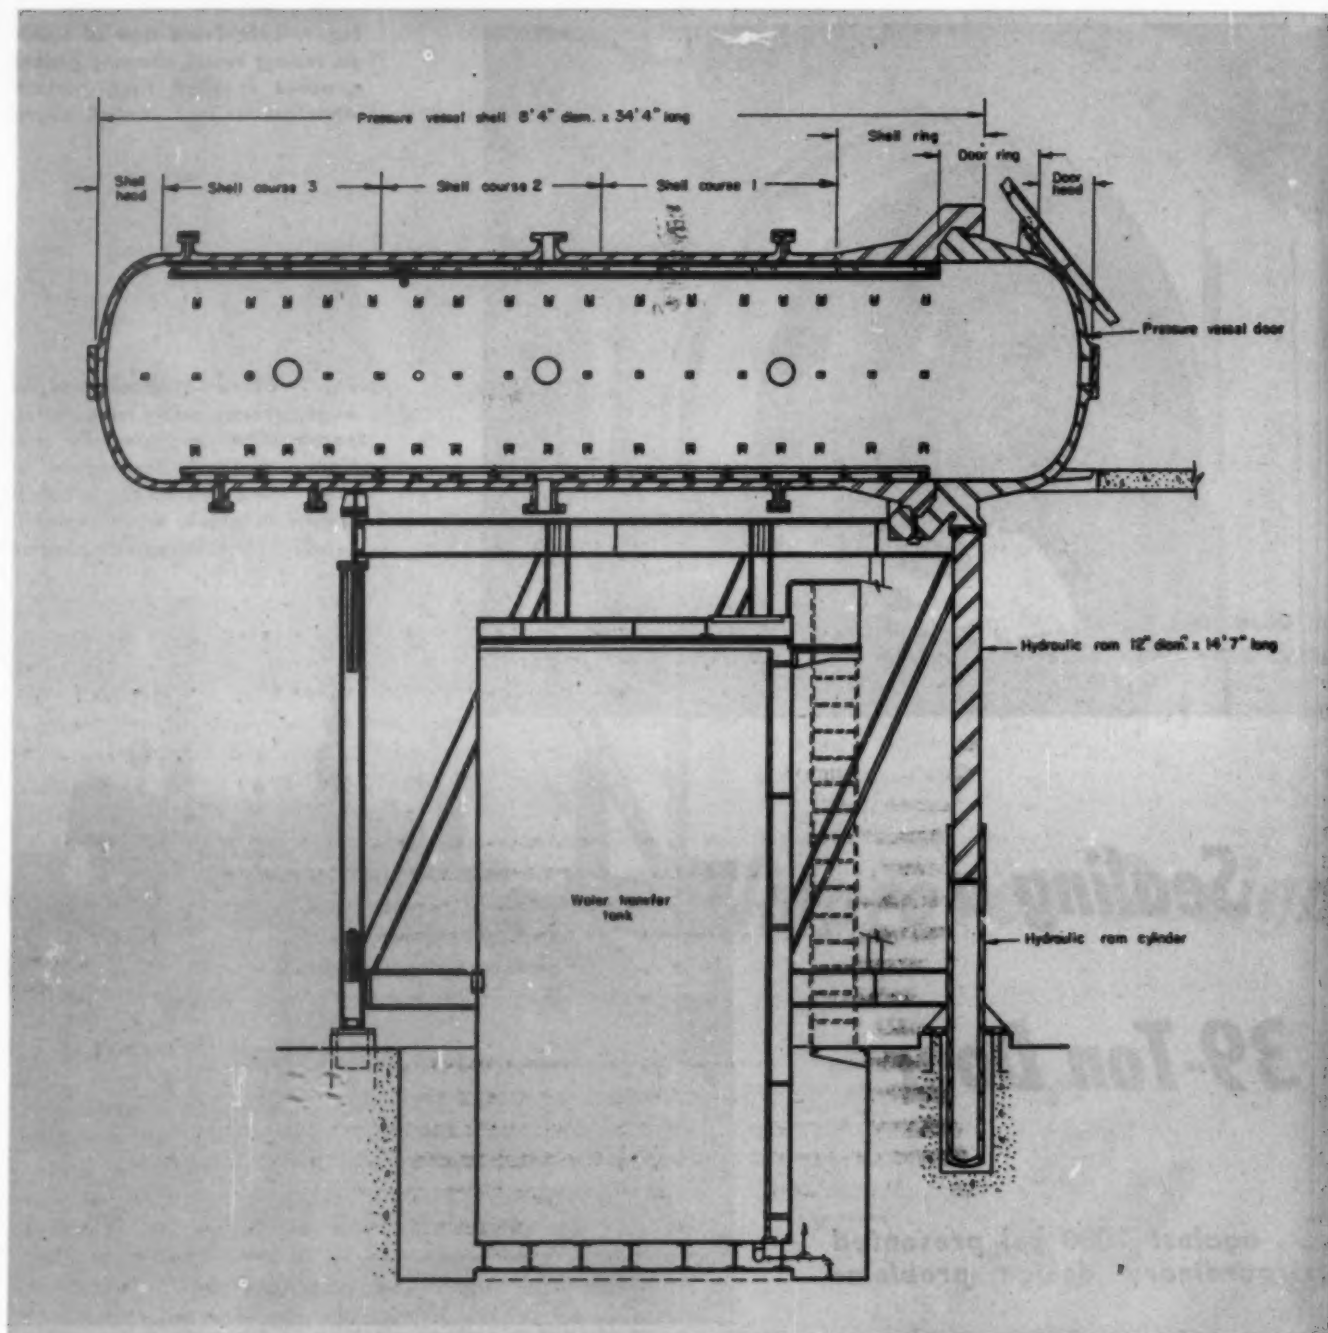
Section through vessel, door, supporting structure, door-actuating ram, and test-water tank
